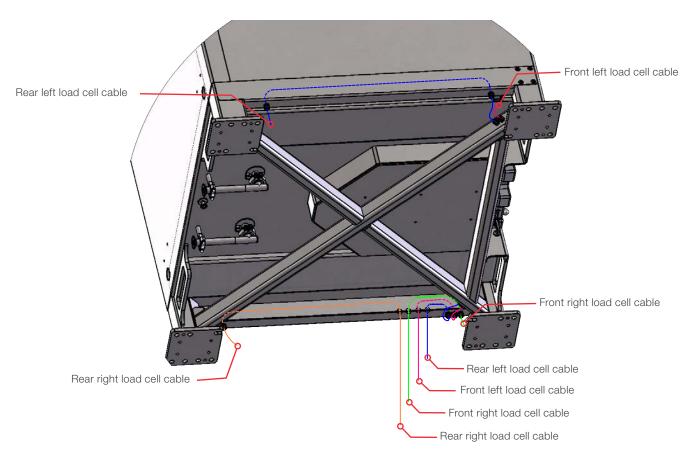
Removing the load cell cables from the DynaDrive unit.
